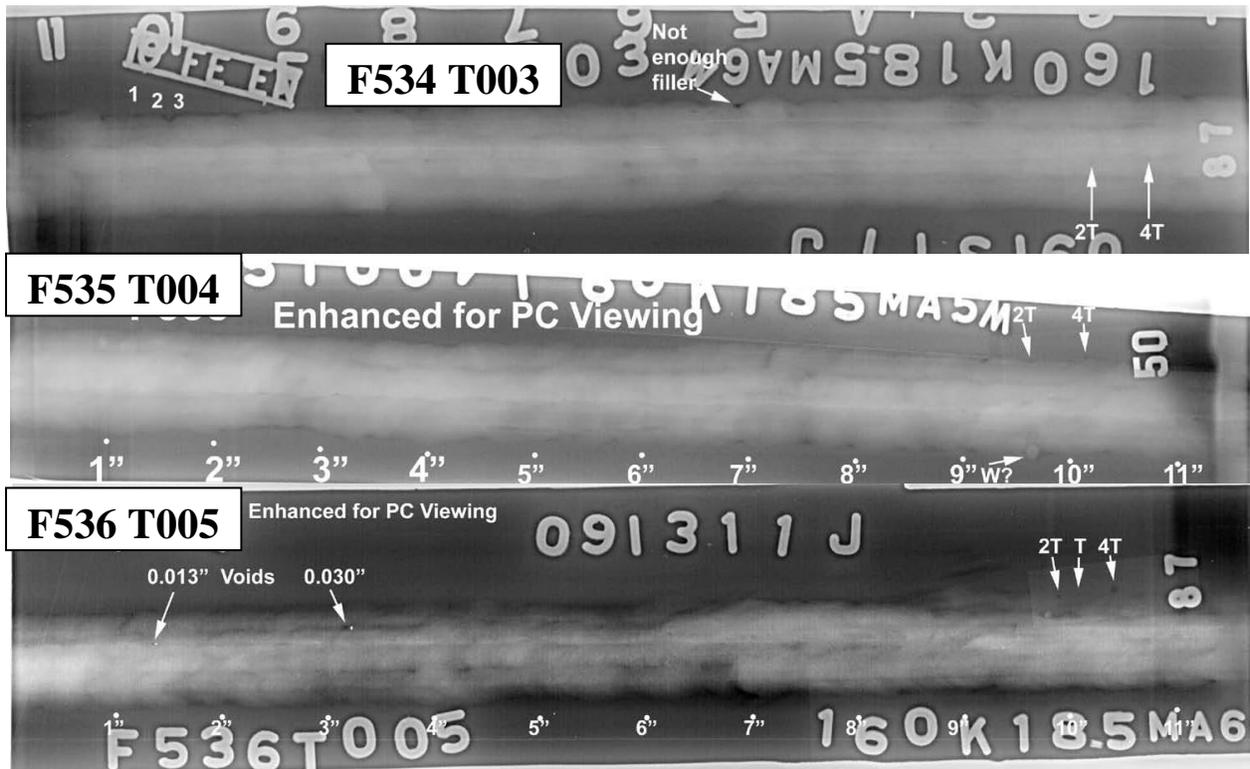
Radiography of the test ENiCuRu Welds
